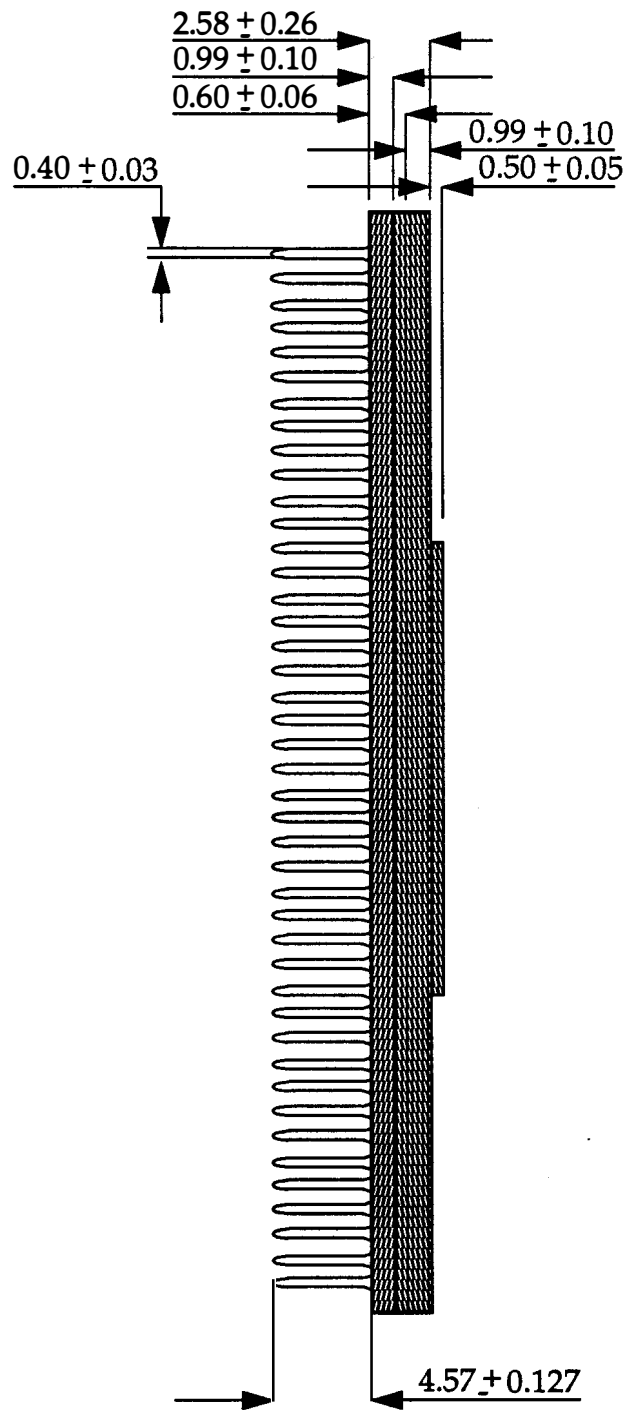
R8000/R8010 Package Dimensions -- Side View
